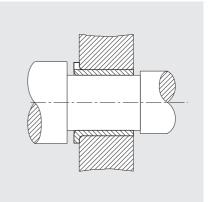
Cylindrical housing bore. Axial retention by means of a recessed shaft with large collar on one side. Absorption of axial forces possible.
